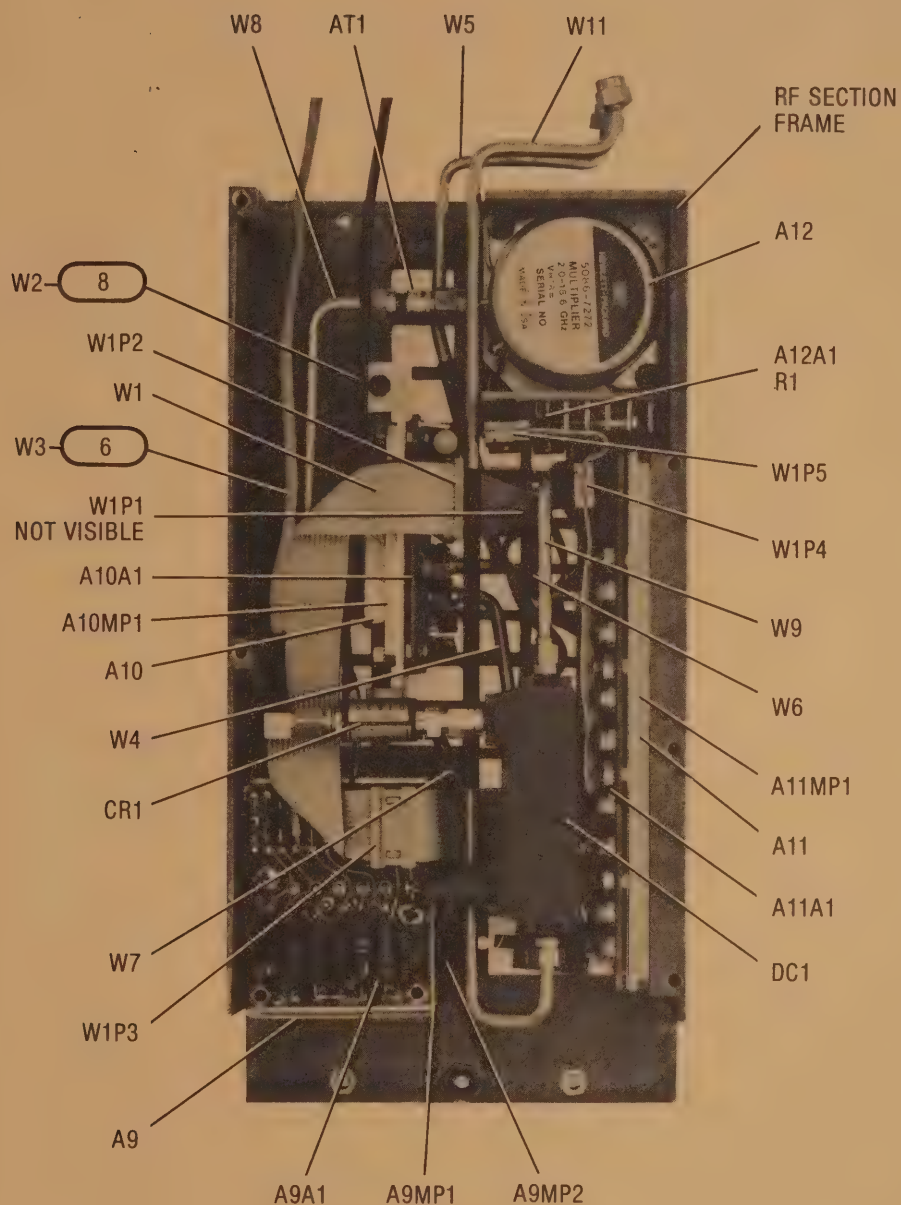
RF Section, Major Assembly and Component Locations (2 of 2), Option 004
